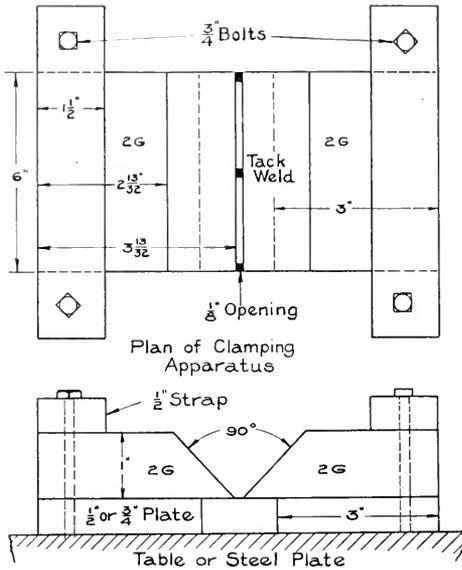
Diagram of Clamping Apparatus Holding Test Plates preparatory to Welding
